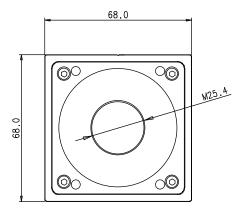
VH-5MC Mechanical Dimension (F-Mount)
